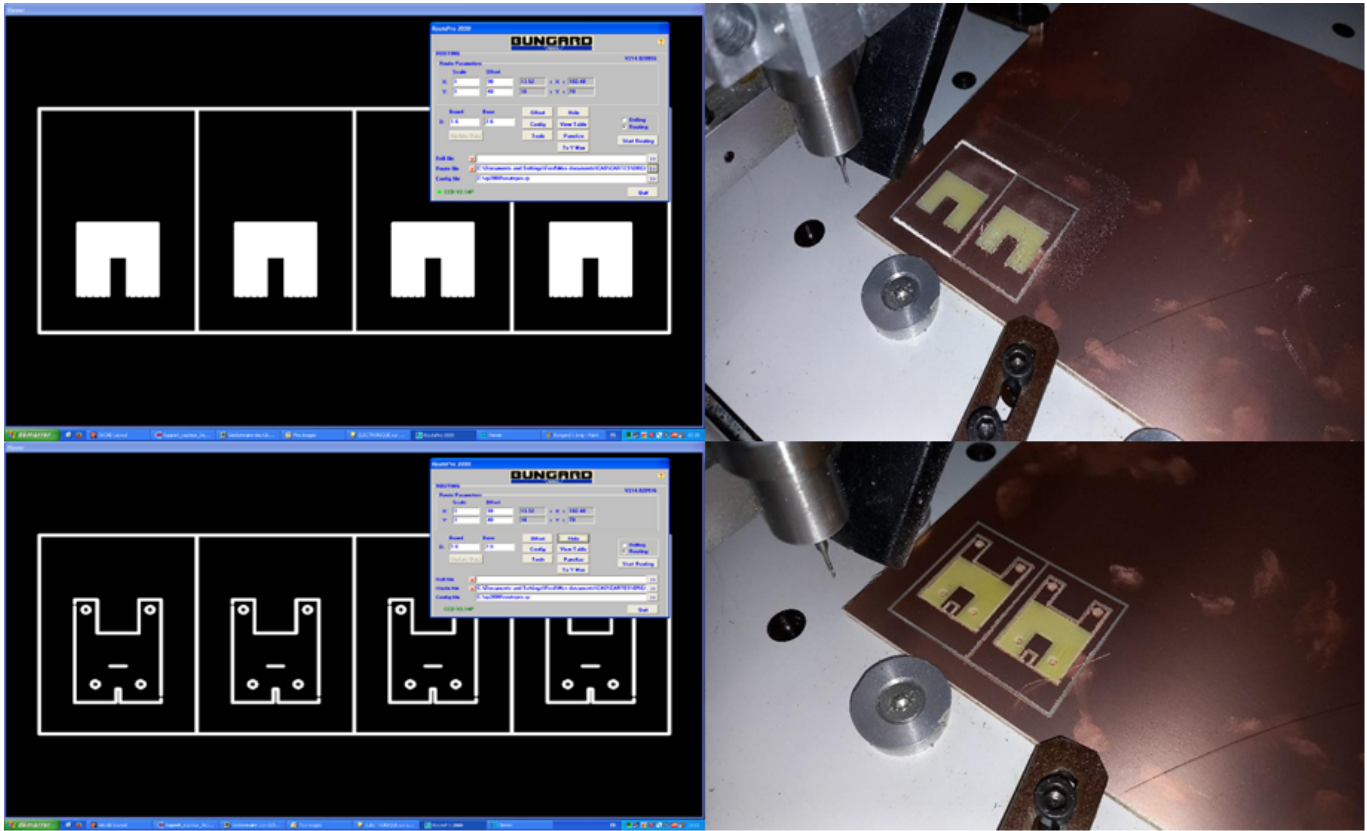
Detailing of the single-sided FR4 printed circuit board (PCB).
